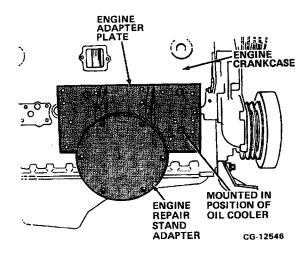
Mounting Engine Adapter Plate to Crankcase
